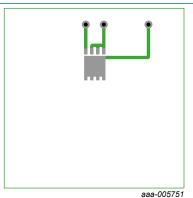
PCB layout for thermal resistance junction to ambient minimum footprint; FR4 Board; 2oz copper
